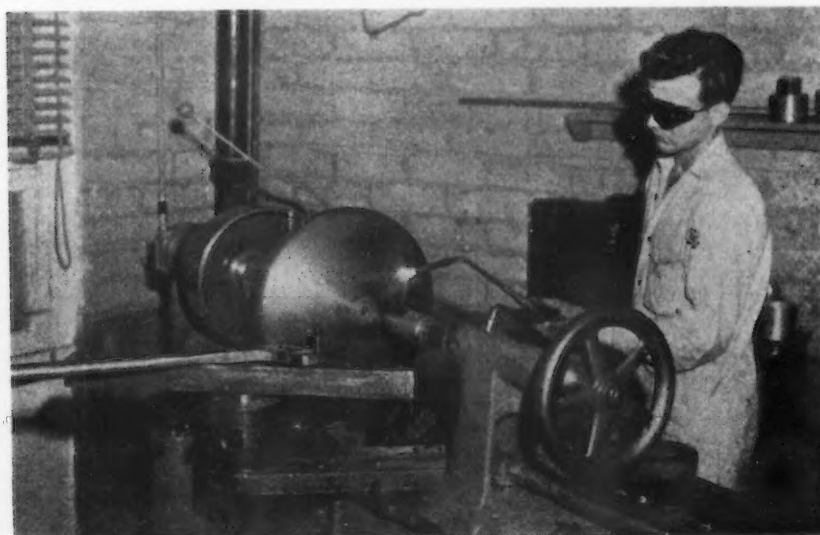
Operator is shown using an ordinary oxyacetylene torch to preheat the chuck for a magnesium spinning job.
